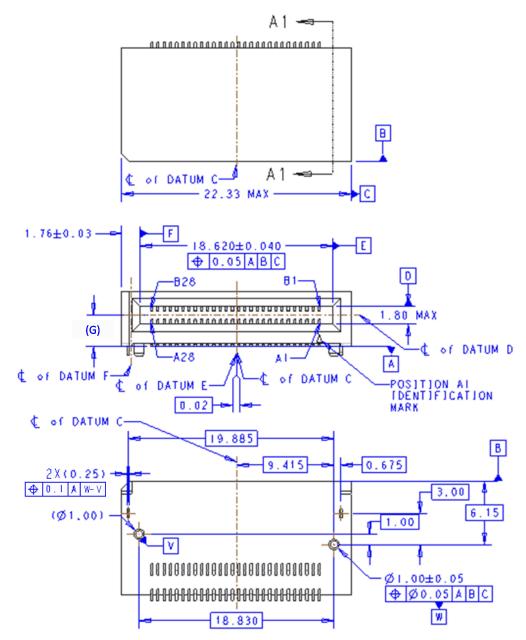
1C RIGHT ANGLE CONNECTOR DIMENSIONS
